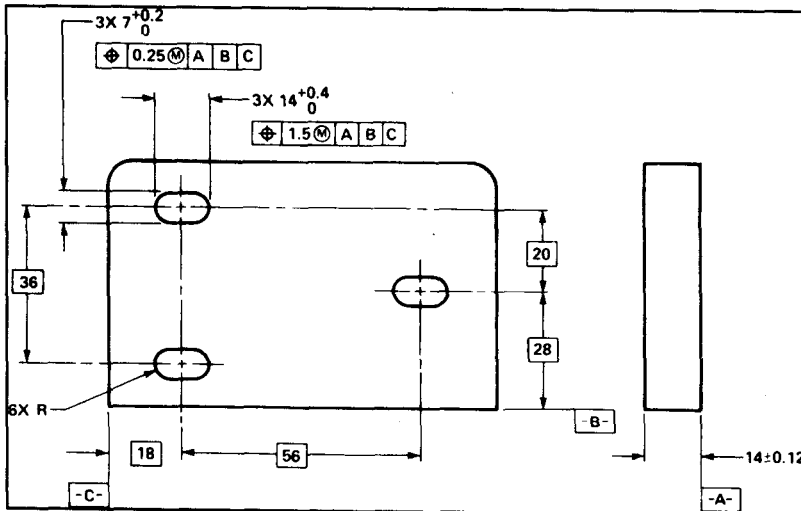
Use of geometric tolerancing. (ANSI Y14.5M.)
